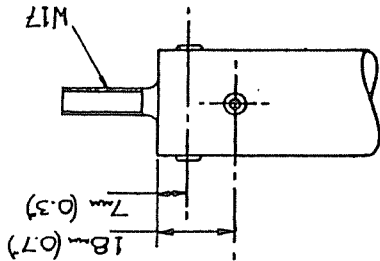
Pop-rivet positions in 1" dia push-rod. Again, ensure all swarf is removed before final assembly of the inserts.
